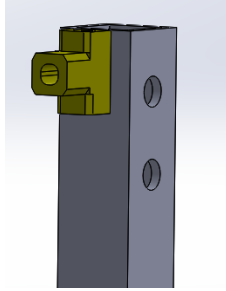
Barstock Tee welded to the top of the leg.
